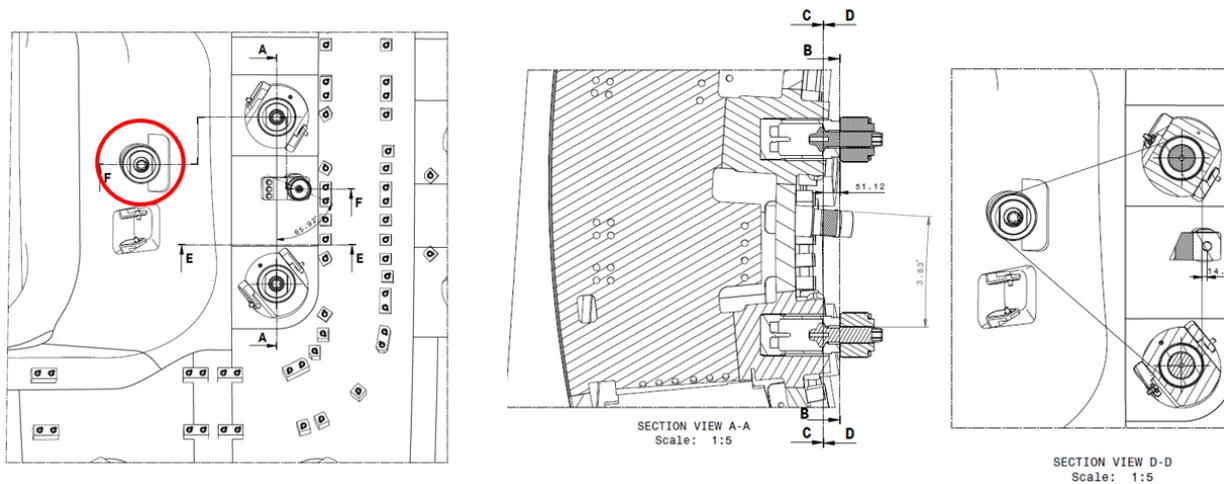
15ND ES position and alignment with respect to the 3 FCBs; red circle shows the FCB to be bolted by hand
